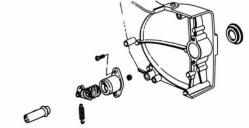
Exploded view of TS 250 R clutch assembly.
